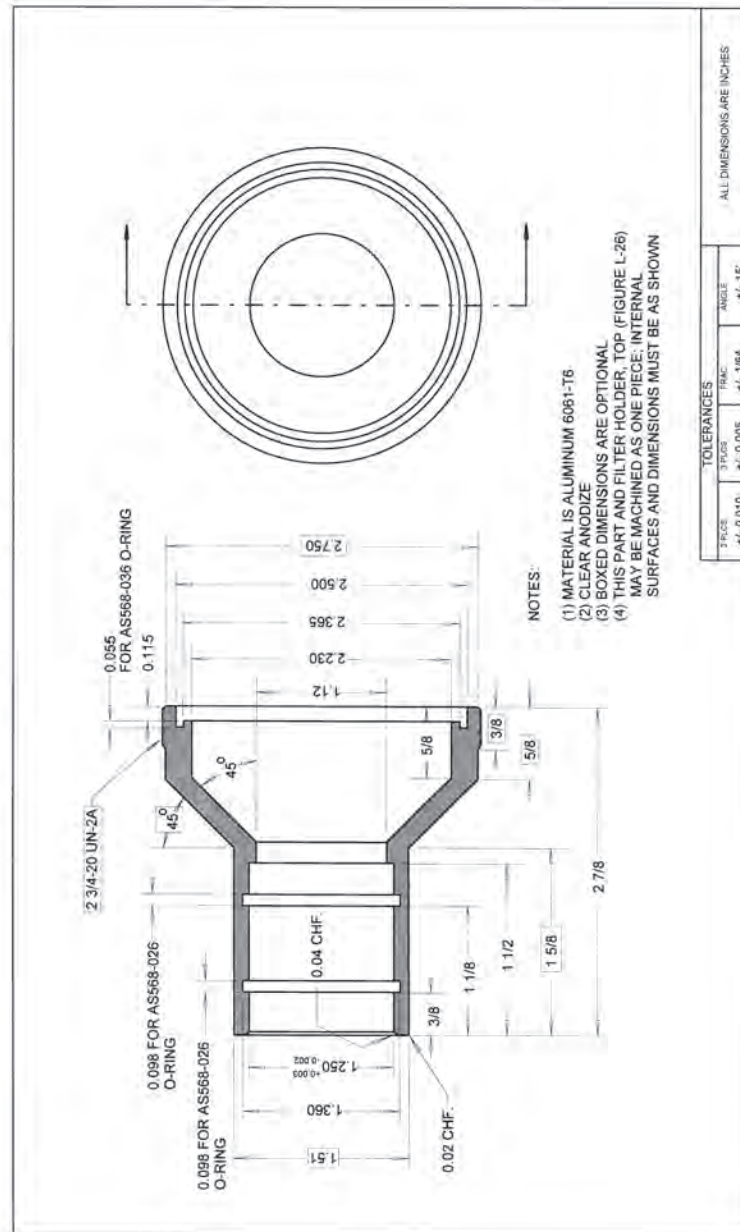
2.5-MICRON IMPACTOR WELL, LOWER SECTION
